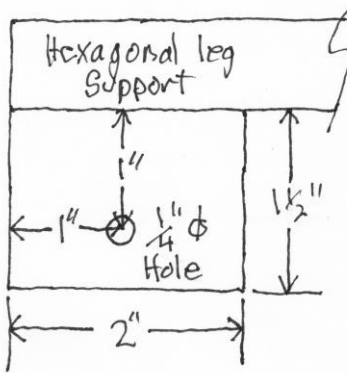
Pattern for the drill holes in parts of the tripod leg support.
